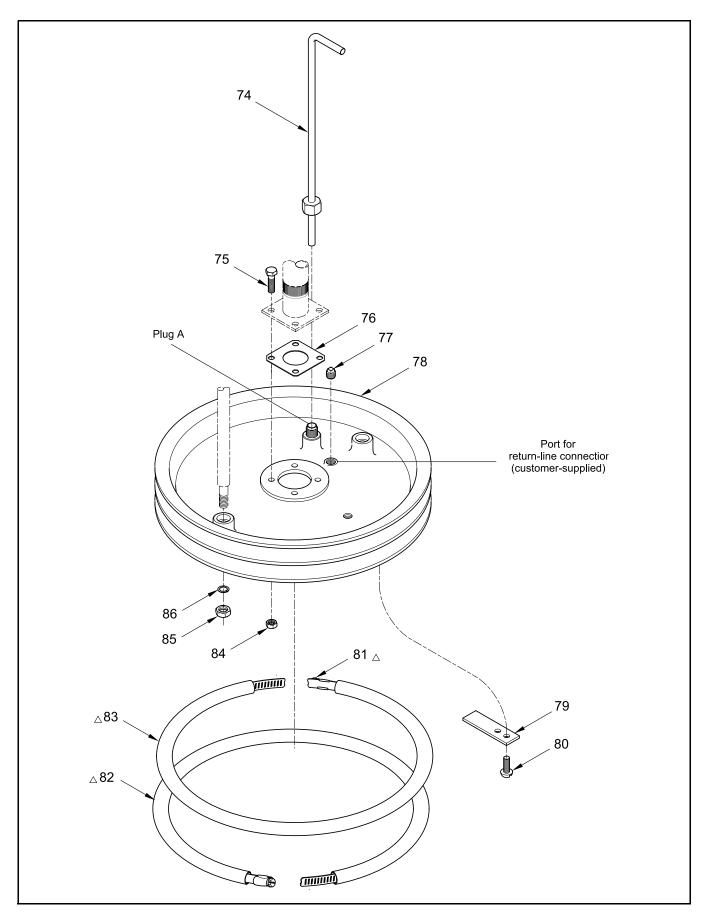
E Pump Hoist Model 7818-F5 - Exploded View (Follower Plate Model 327690)
